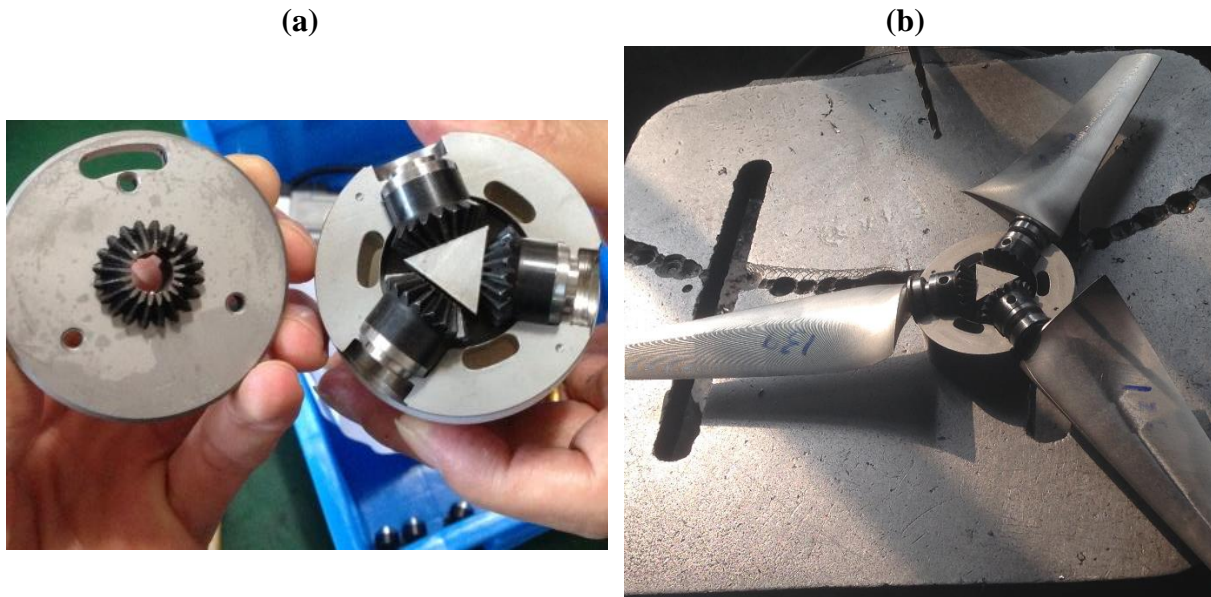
(a) Blade Pitch Mechanism of Scaled Tidal Turbine Model and (b) Rotor Blades Assembled into the Hub and Blade Pitch Mechanism.
